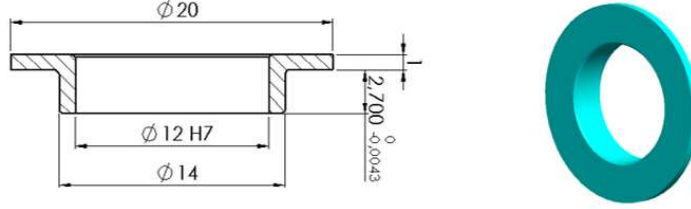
Technical drawing of the flanged bushing, on the left, and its CAD model, on the right.
